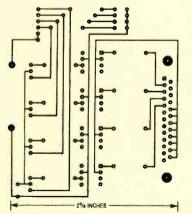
If you wish to make a PC-board, use this solder-side foil pattern. Note that it is shown here smaller than actual size.
